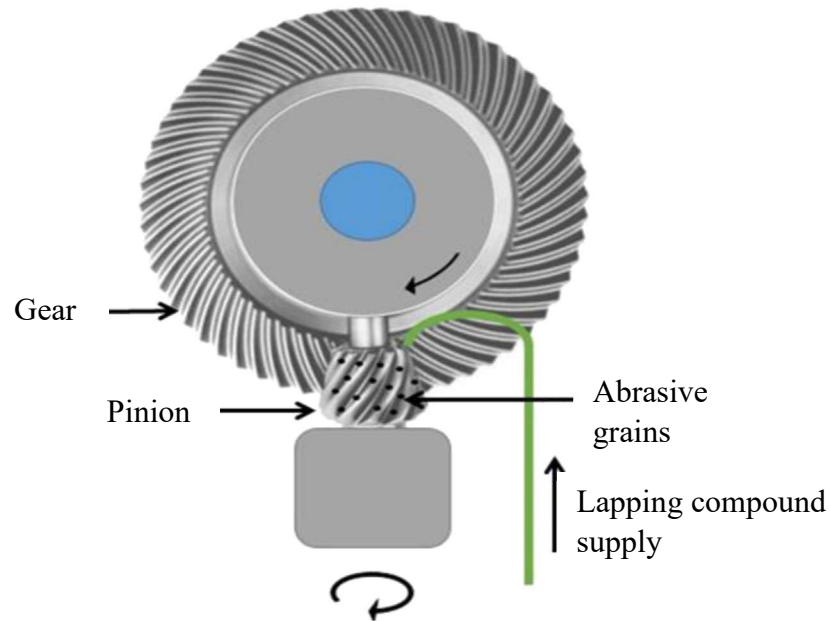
Spiral bevel gear finish by lapping process [13]
